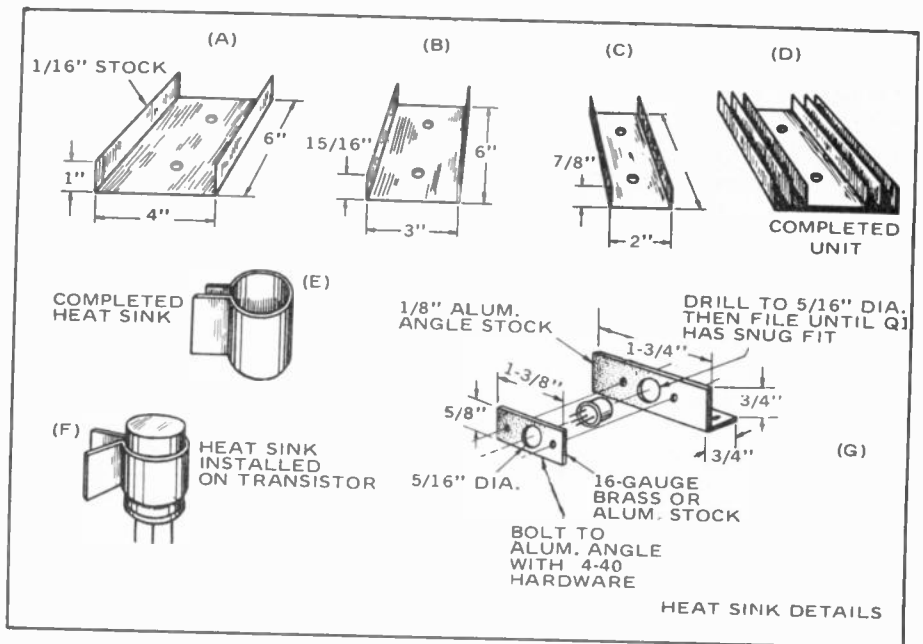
Layout and assembly details of another homemade heat sink. The completed assembly can be insulated from the main chassis of the transmitter by using insulating washers.
